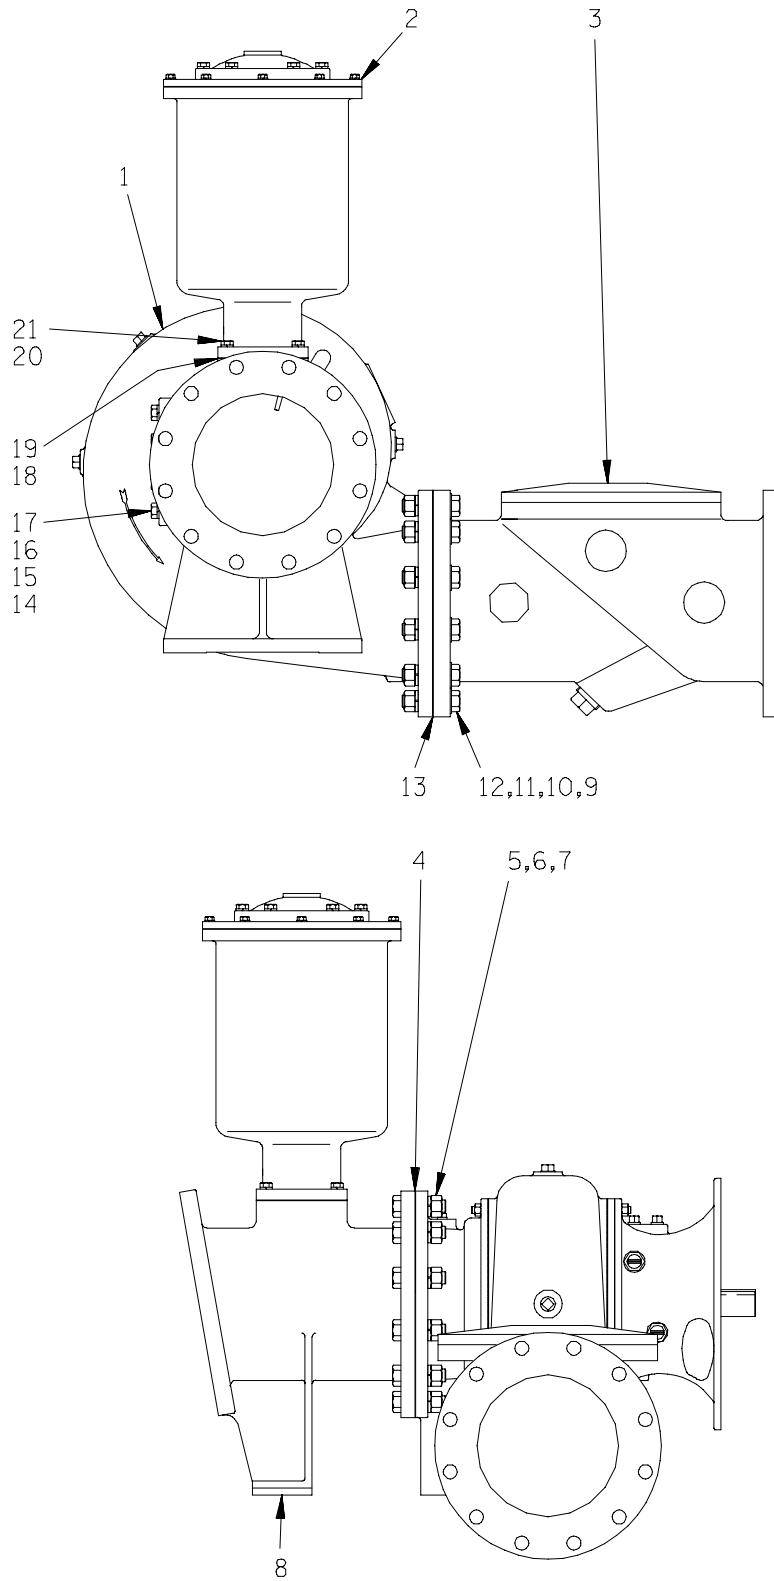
PA10A60-(SAE 3/11.5) Pump Model Assembly
